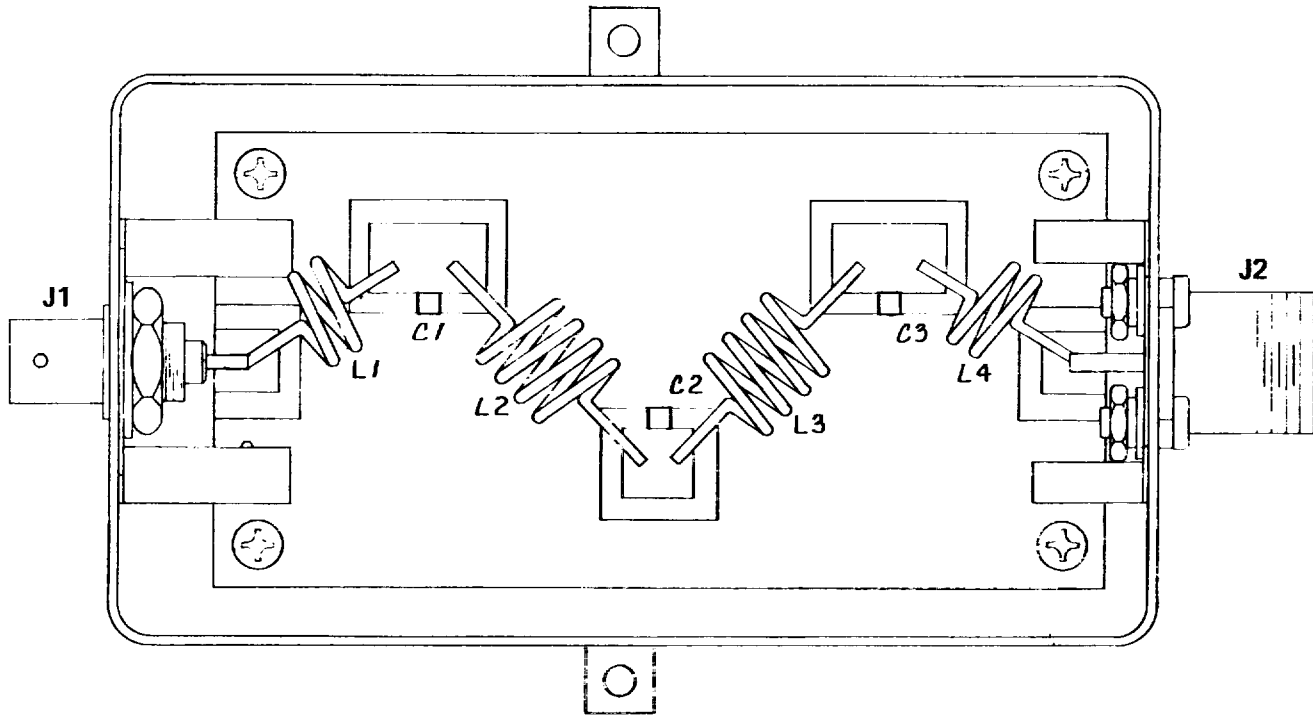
Low Pass Filter, 1A4FL1 Parts Location Diagram
